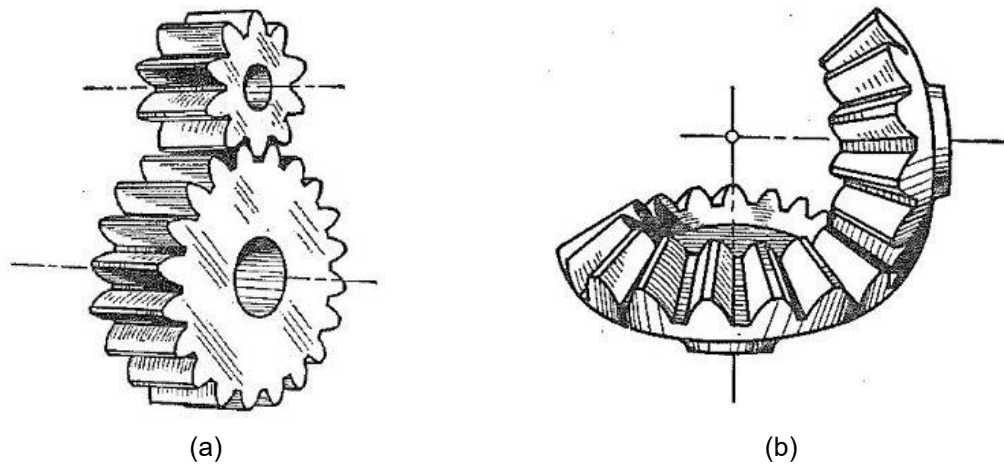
Gears in contact (a) Spur gears, and (b) Bevel gears [2]
